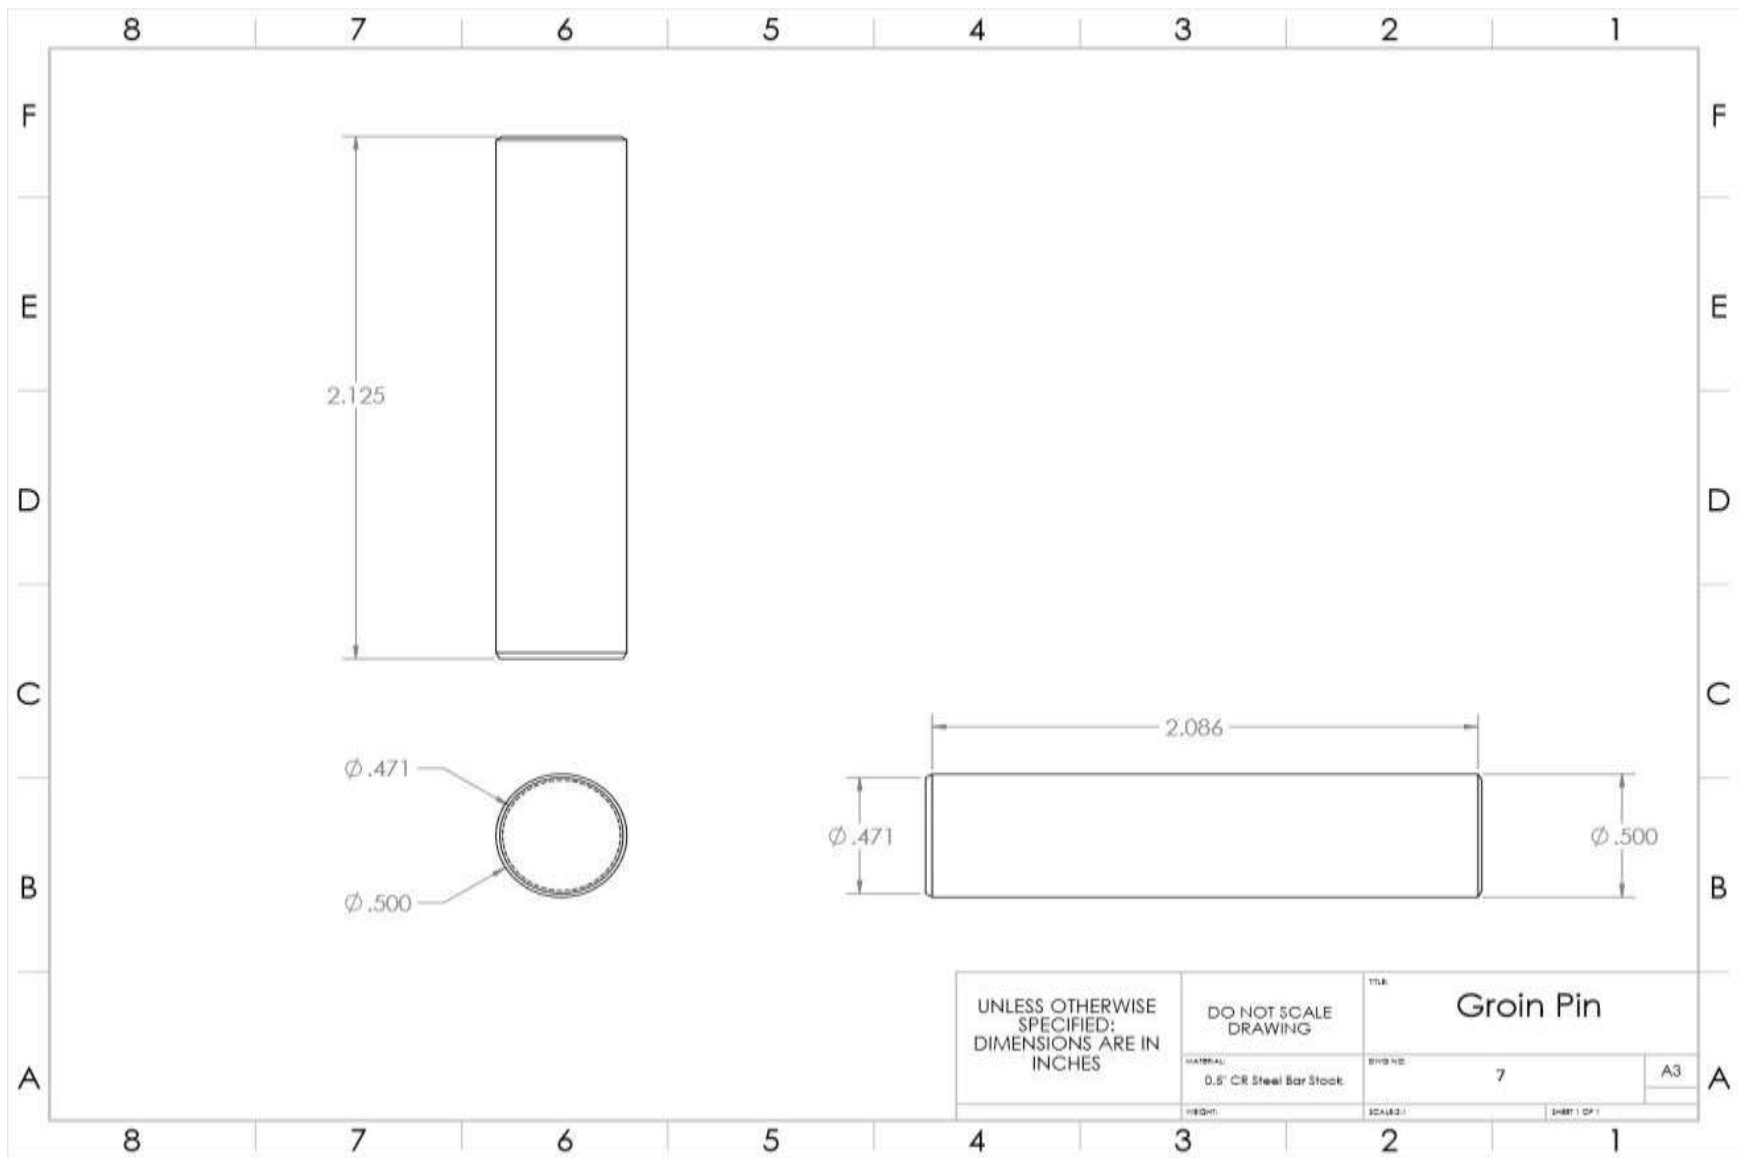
7. Mechanical Drawing of Groin Pin.
